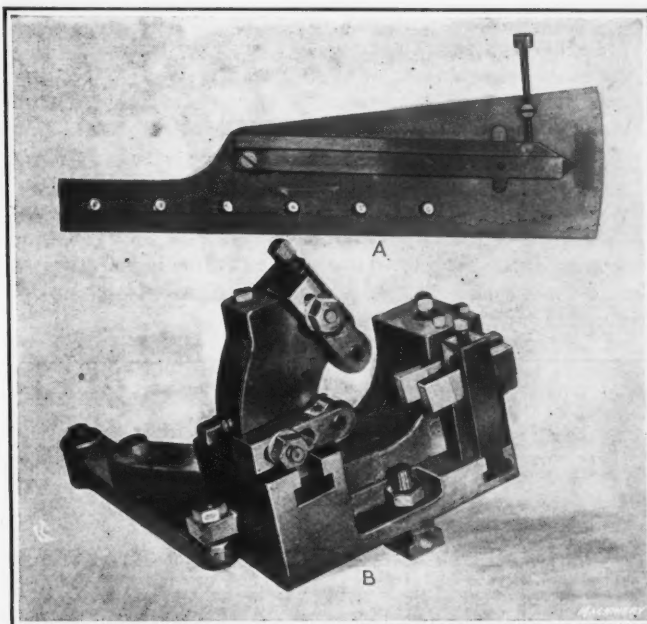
Taper-turning Tool and Guide used on Gridley Turret Lathe
